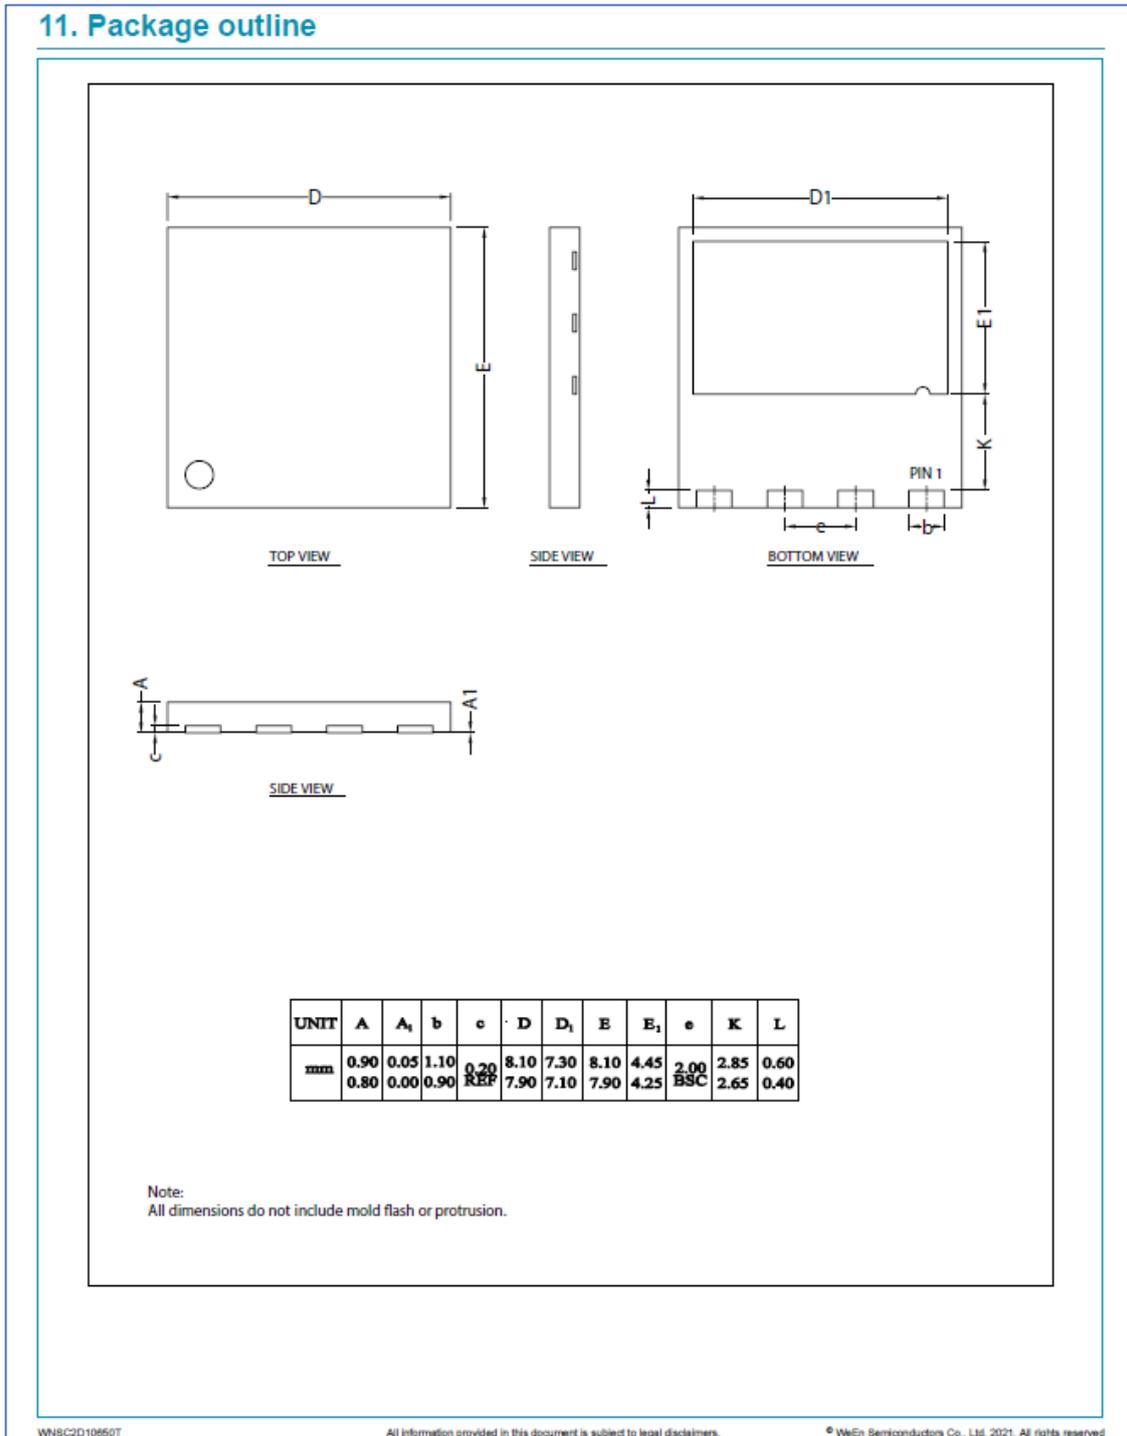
Example of a “DFN” package outline drawing (WNSC2D10650T)
